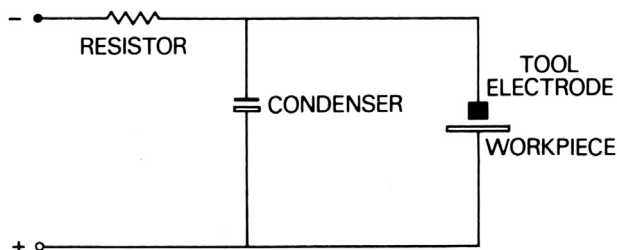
Electro-discharge machining circuit. (Source: Rolls Royce.)
